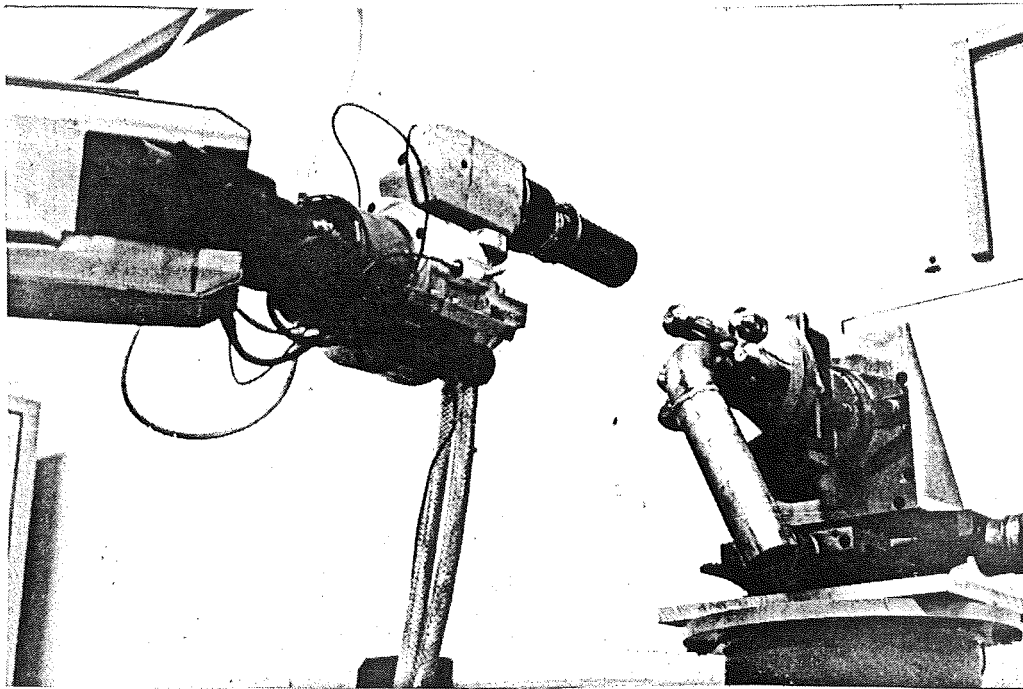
Robot Holding Percussion Wrench Approaches Flange
